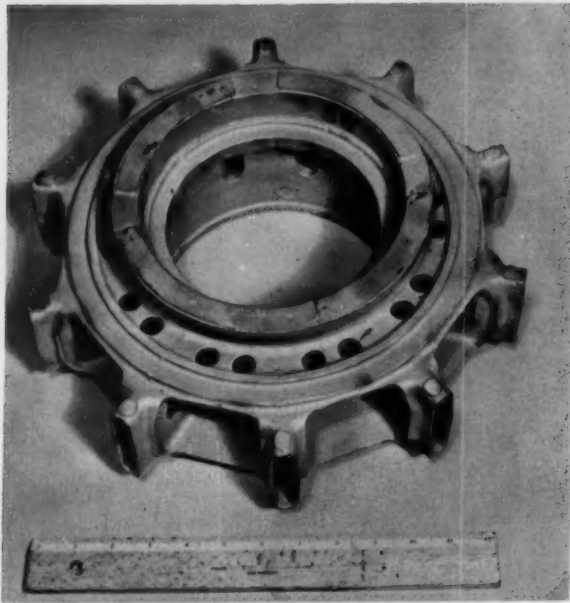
Casting produced from wax pattern made in a water dispersable sand mold.
